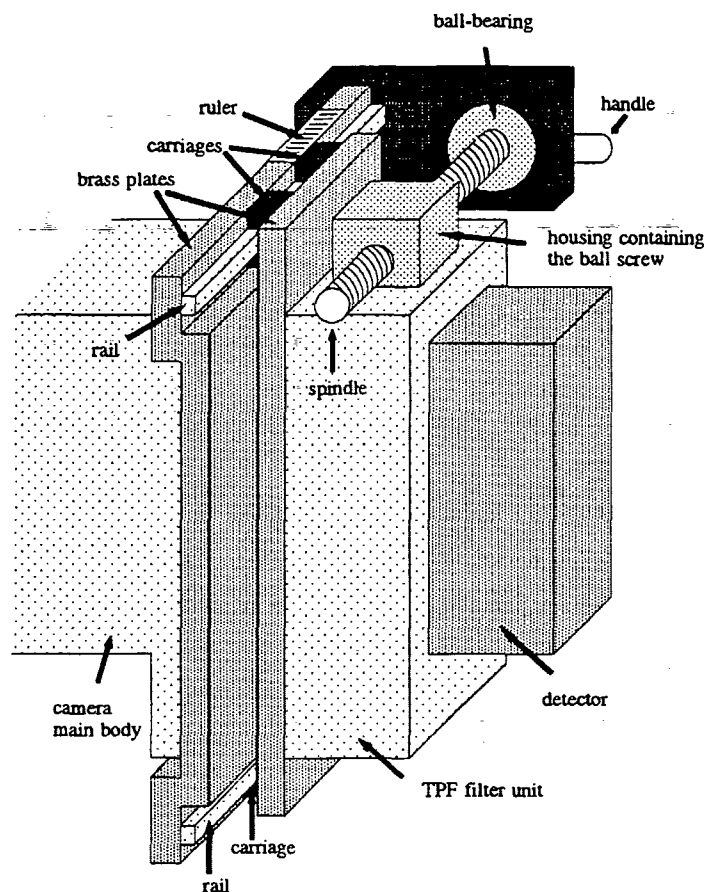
Schematic drawing of the sledge mounted between the camera main body and the TPF filter unit. Shown are the two plates and the rail/carriage system. On top of the filter unit, a ball screw is mounted in a housing, the spindle being fitted to a ball-bearing. A handle allows positioning. The position of the movable plate is read off using a ruler. For details see text.
